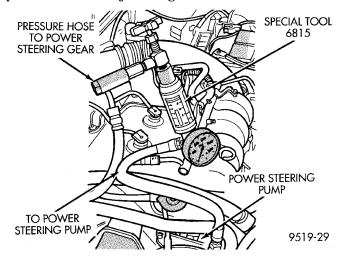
Power Steering Pump Flow/Pressure Tester Connected To Power Steering Pump
